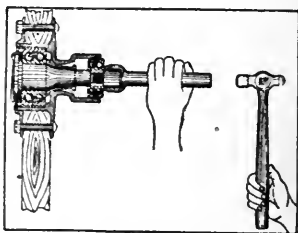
Showing How the Blows of Hammer May Be Distributed Evenly with Tubular Tool.
